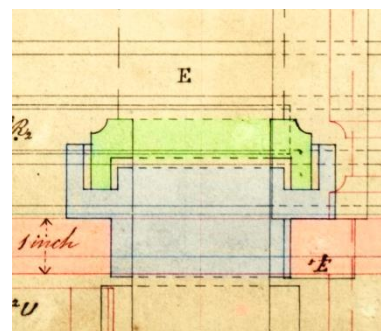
Cam-stack thrust bearing (A/160) (colour added).
